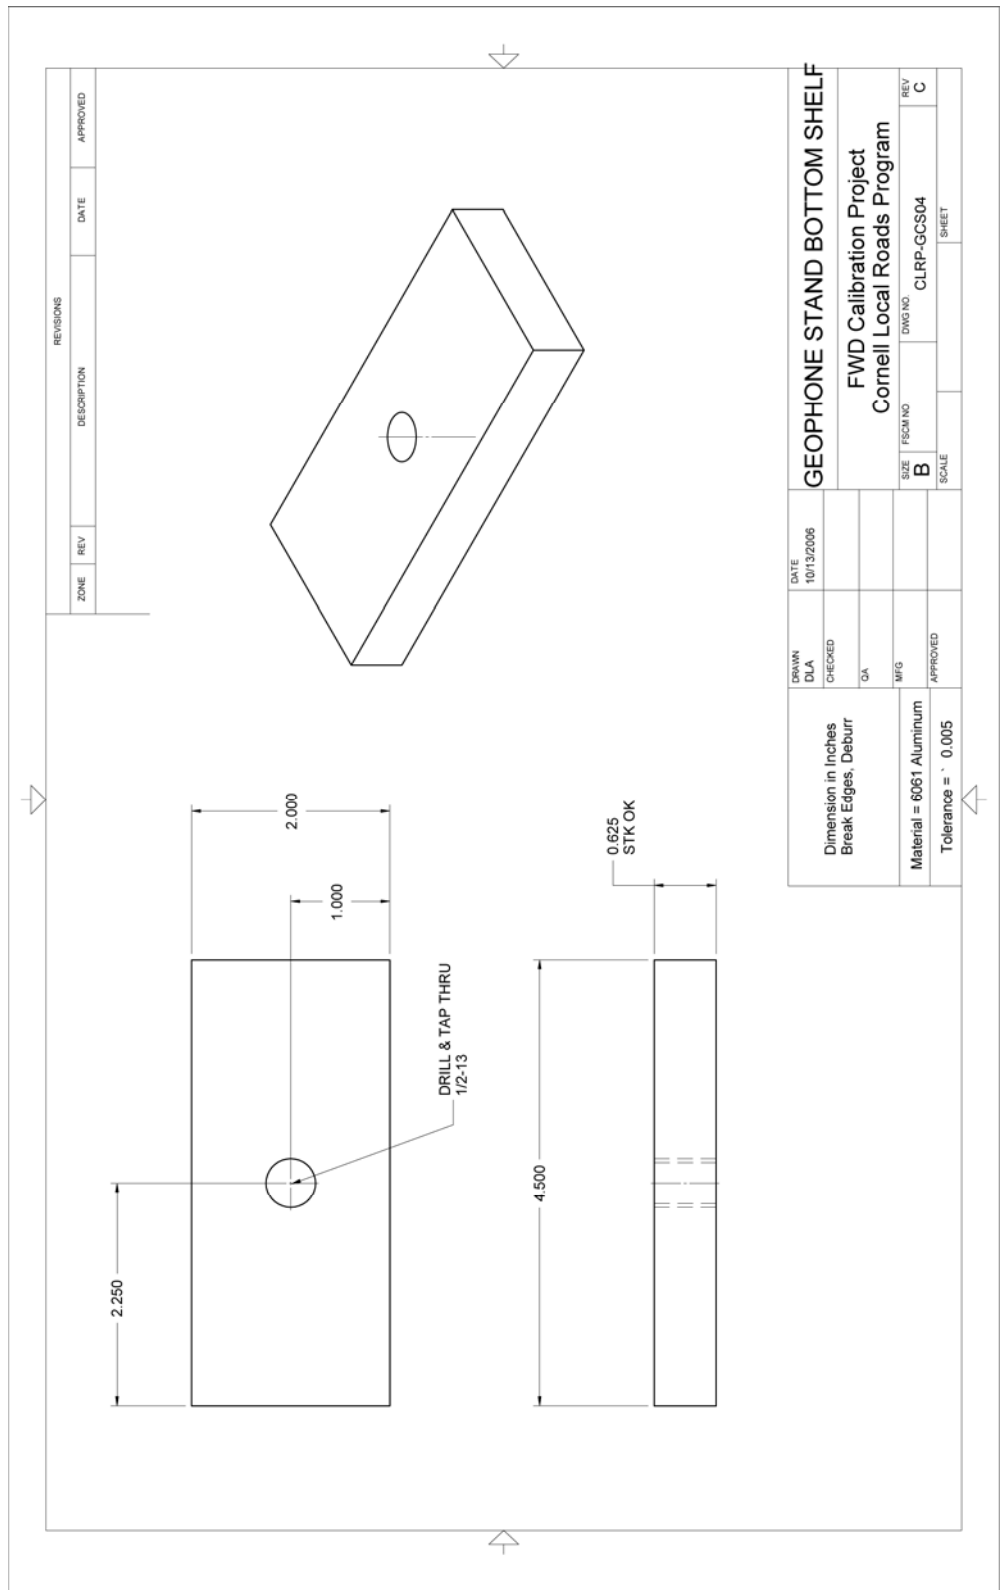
Drawing. CLRP-GCS04 Geophone Stand Bottom Shelf.
